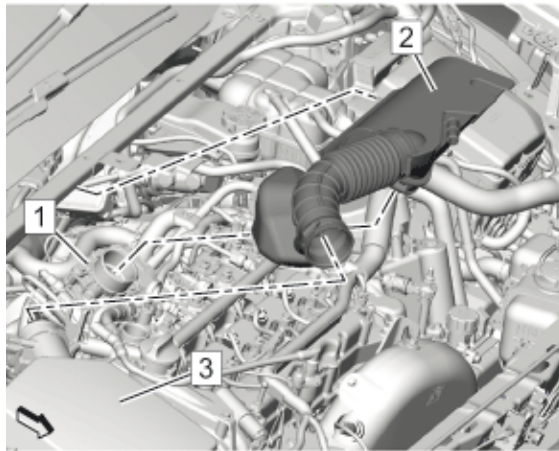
Air Cleaner Outlet Duct, Air Cleaner Assembly And Throttle Body
